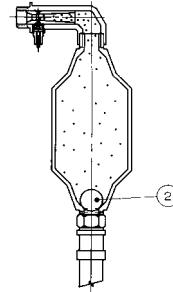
The air accumulated inside the body pushes the rubber ball (2) to the bottom, thus blocking the passage. At this point the valve closes and the rubber ball prevents the air accumulated inside the body of the air supply unit from reaching the pump intake.
